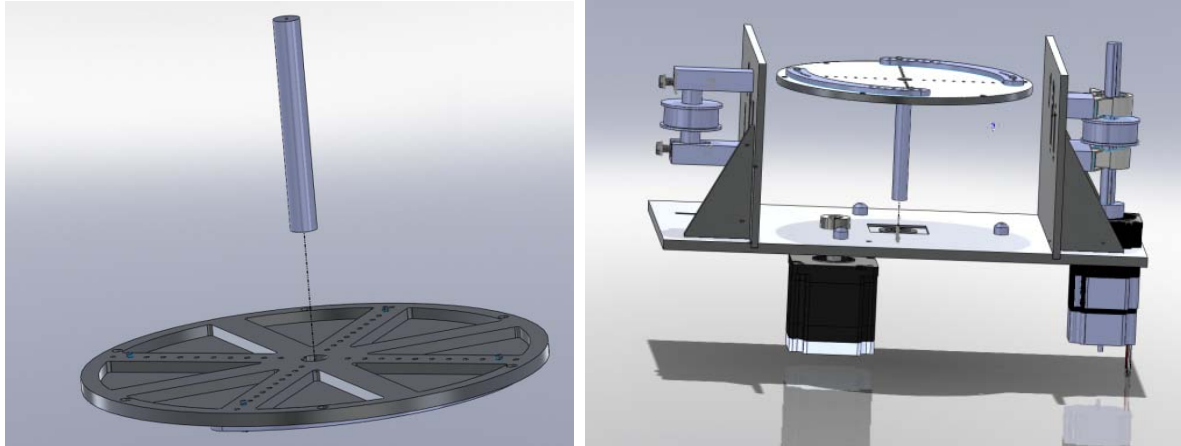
Drive gear mounting onto Rotational Motor with keyway alignment
